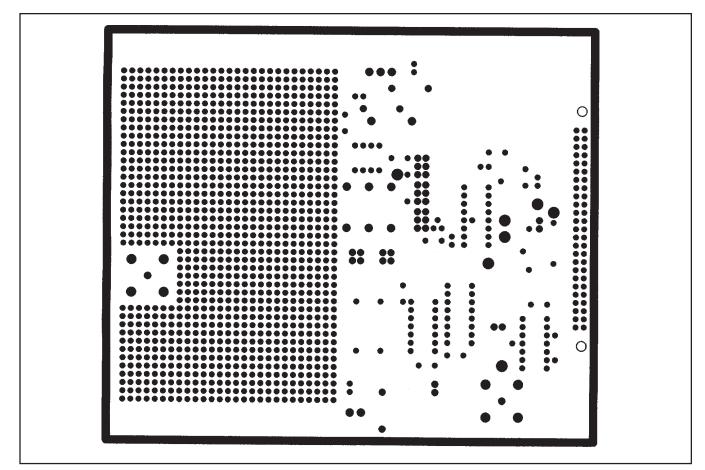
Bottom Soldermask of the DEM-ADS7812/13P Demonstration Board.
